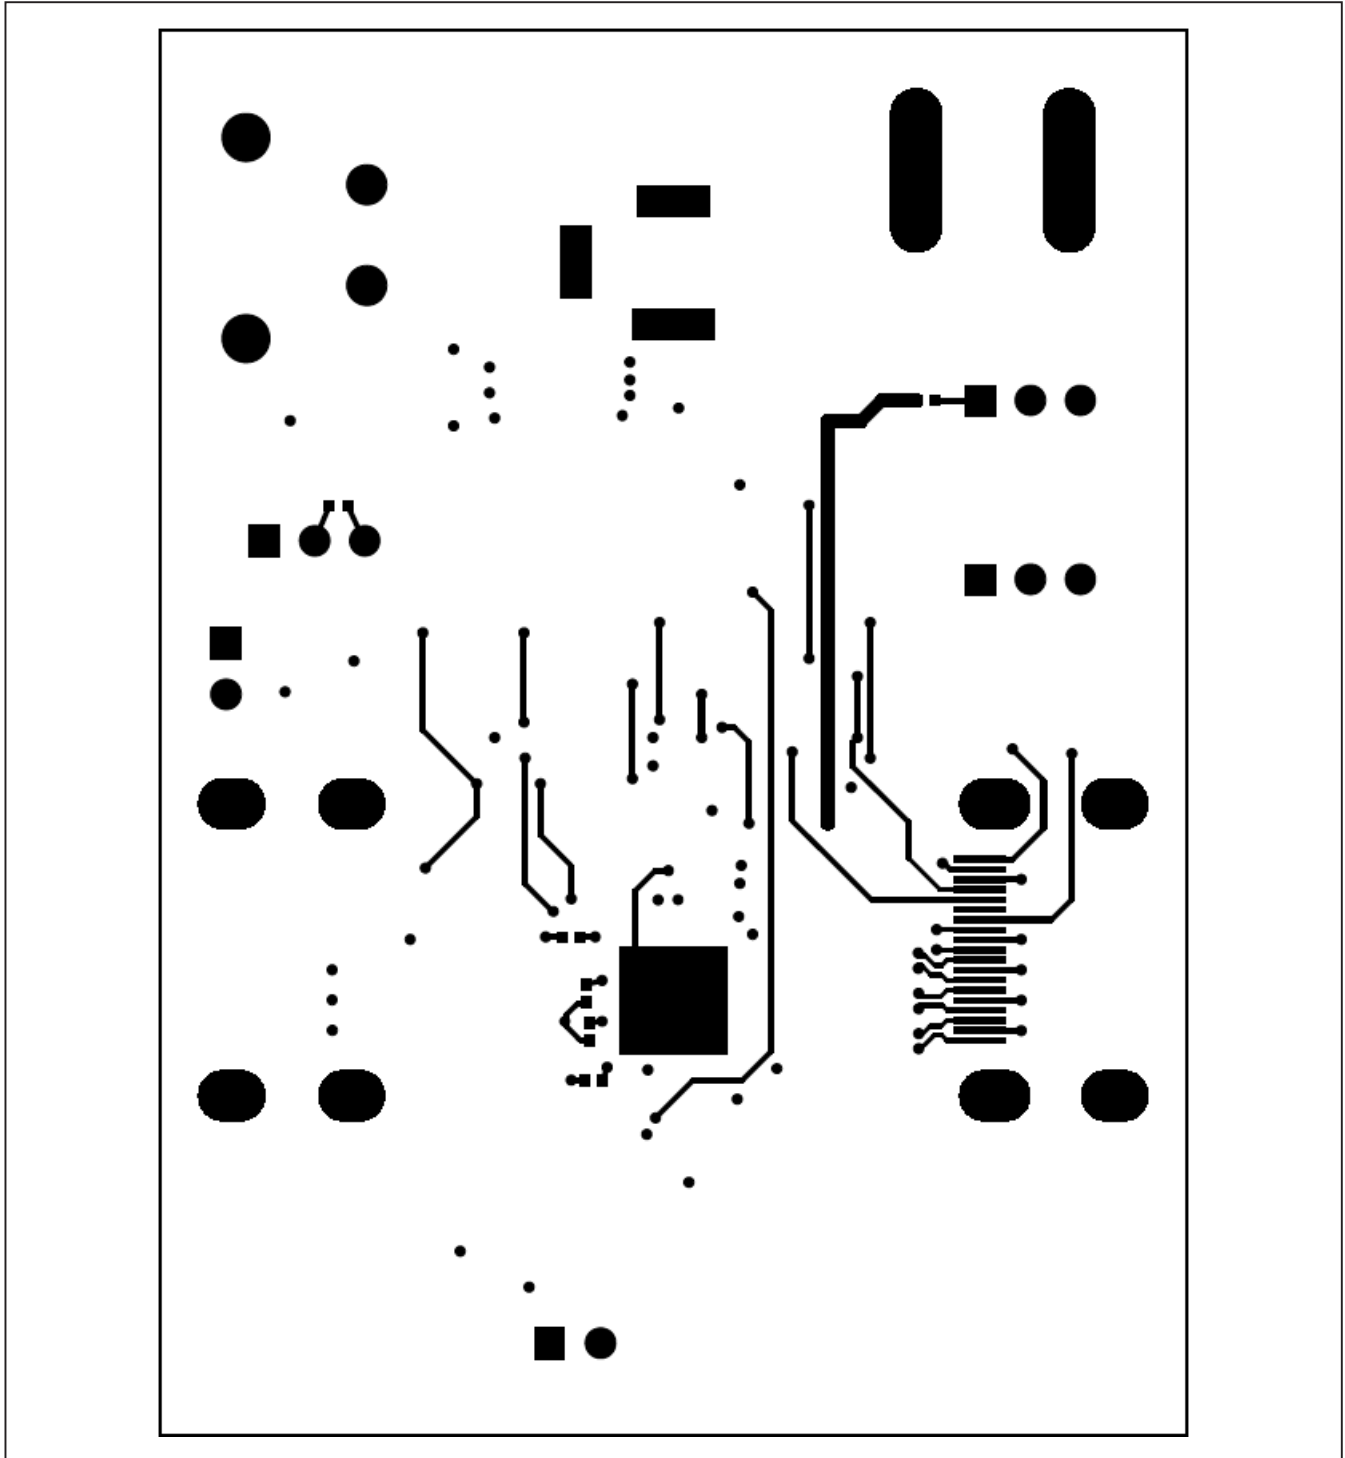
MAX3815A EV Kit PCB Layout—Solder Side
